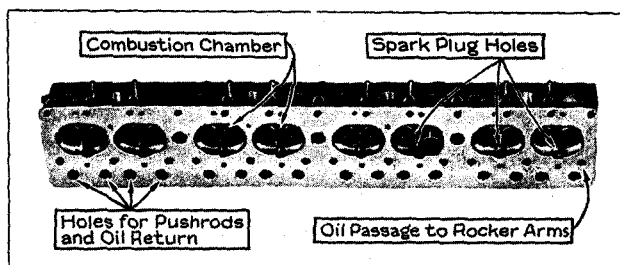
The cylinder heads contain the overhead valve mechanism.
